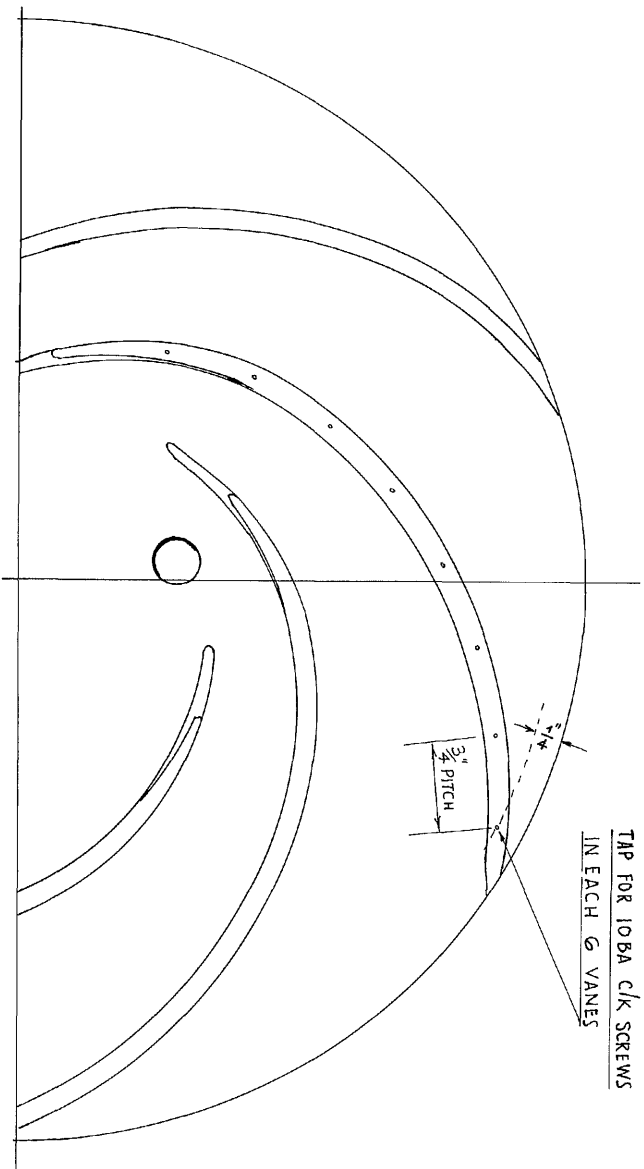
MODIFIED PUMP IMPELLER.
